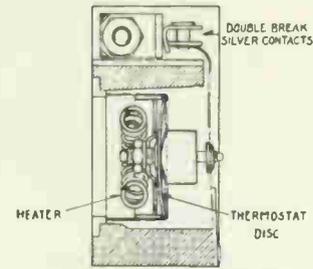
SECTIONAL VIEW TYPE MW OVERLOAD RELAY WITH RESET ROD REMOVED
